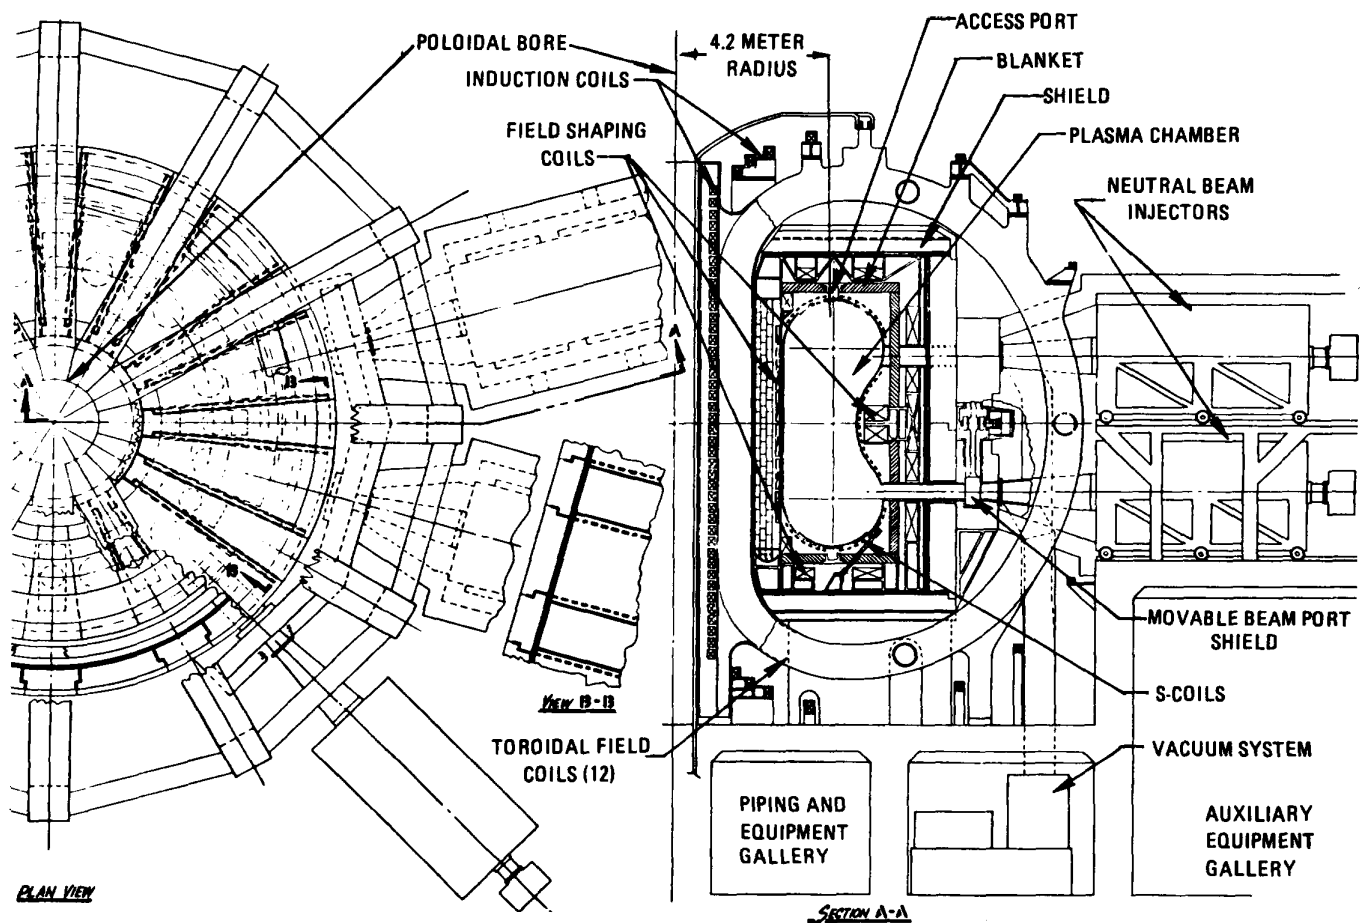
Upgradable Ignition Test Reactor (UITR)
